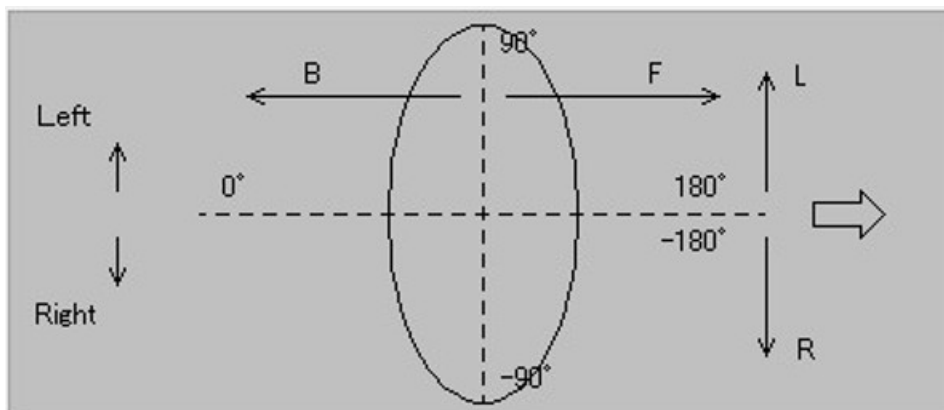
Spiral weave welding path. With L and R at 4 mm, B and F at 2 mm
